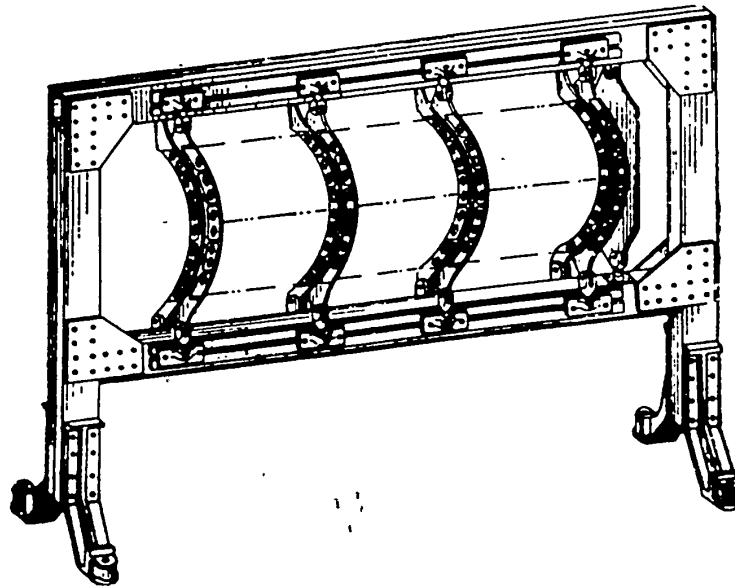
Jig Made of Standardized Components for the Assembly of Panel Sections
